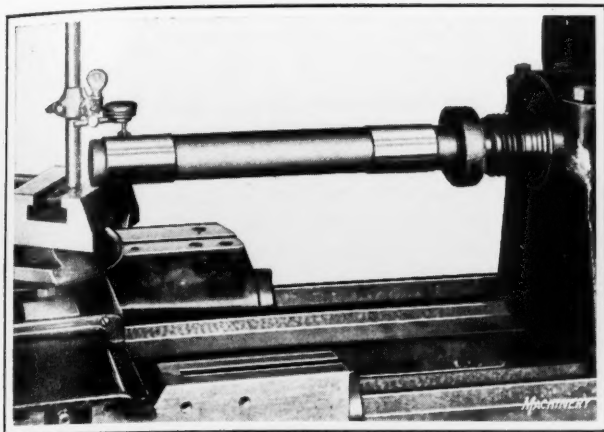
Determining the Alignment of the Headstock Spindle when assembled on the Machine
